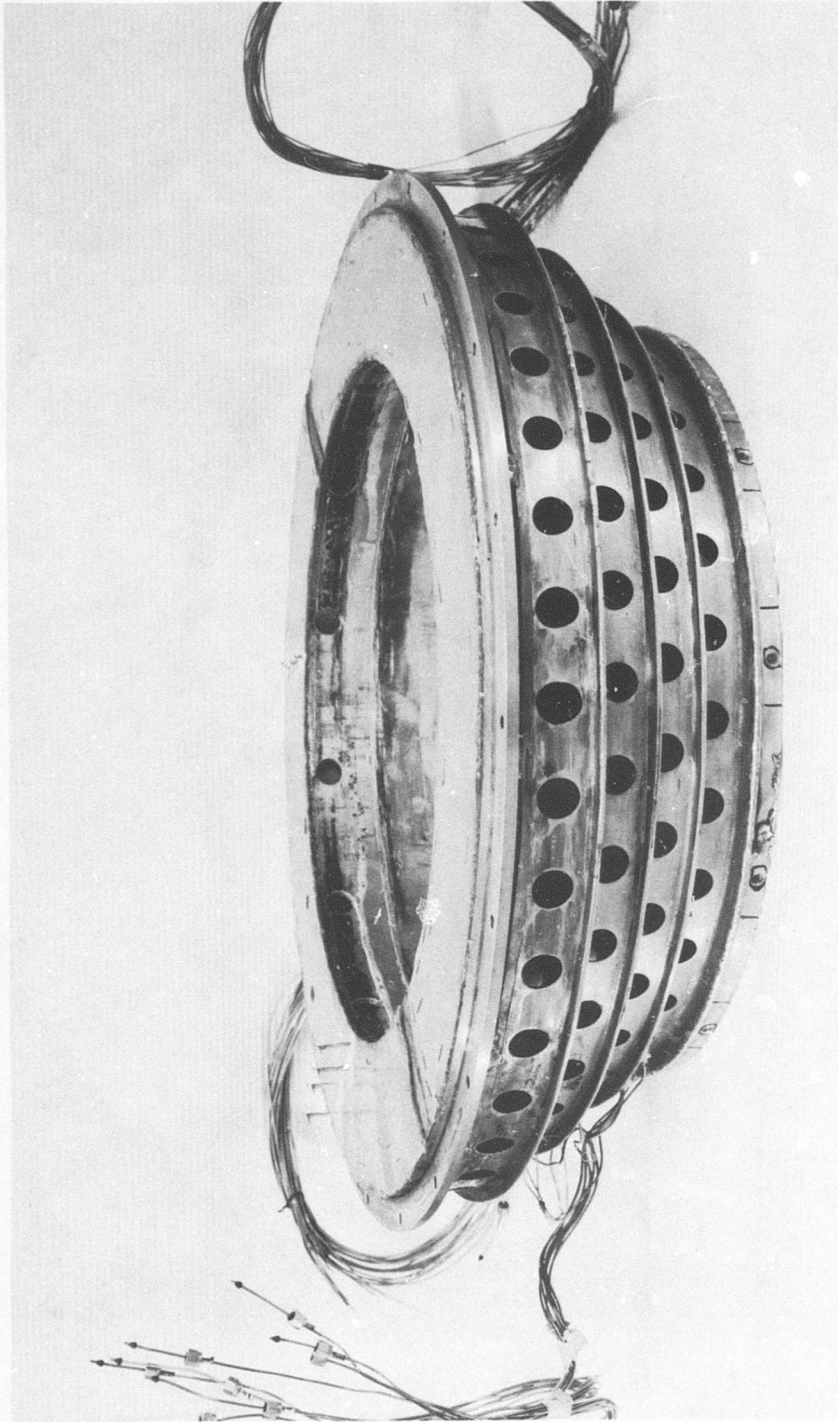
Porous Surface and Bleed Chambers Used With the Low-Speed Rotor.
